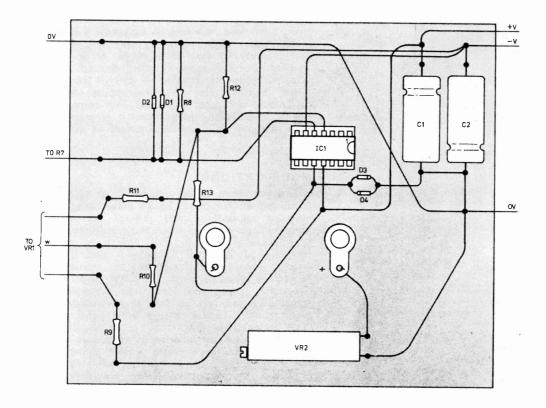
Wiring arrangement used in the author's prototype. The components are mounted on perforated board and the wiring is carried out on the underside
